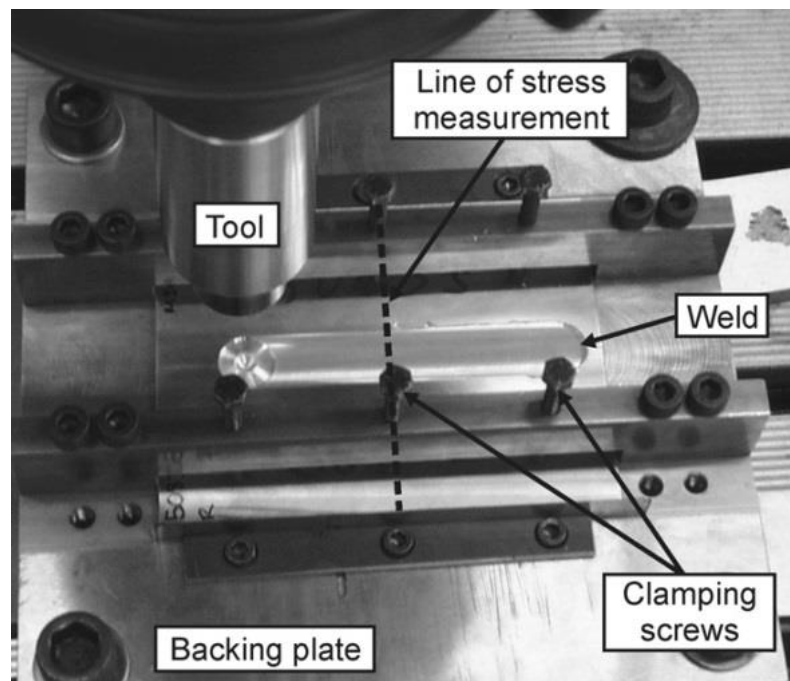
Tool set-up for conventional friction stir welding process [60].
